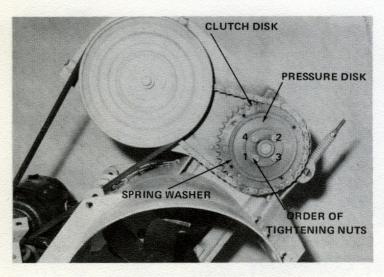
TORQUE LIMITER ADJUSTMENT
